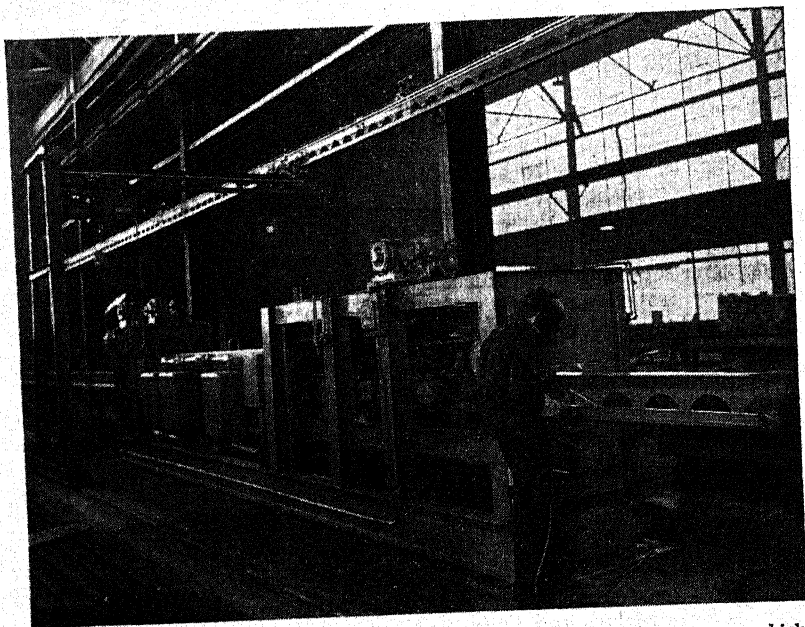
General arrangement of drive, rolls and adjacent roller conveyor which supports beams before and after welding.
